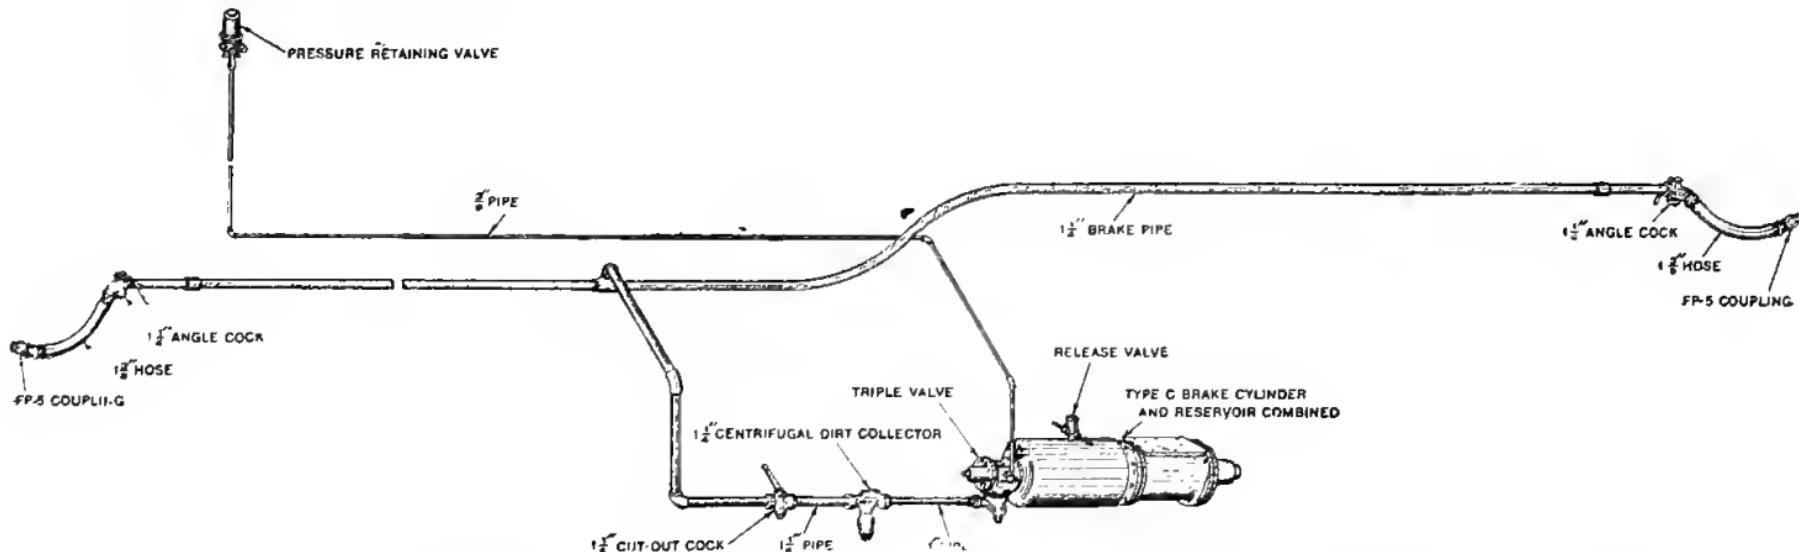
Piping Diagram of Standard Single Cylinder Freight Brake Equipment, Schedule KC.
